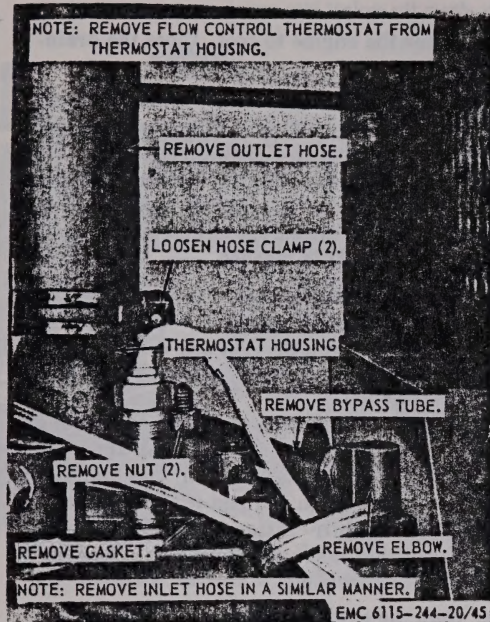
Flow control thermostat, thermostat housing, coolant inlet and outlet hoses, and coolant bypass tube, removal and installation.
